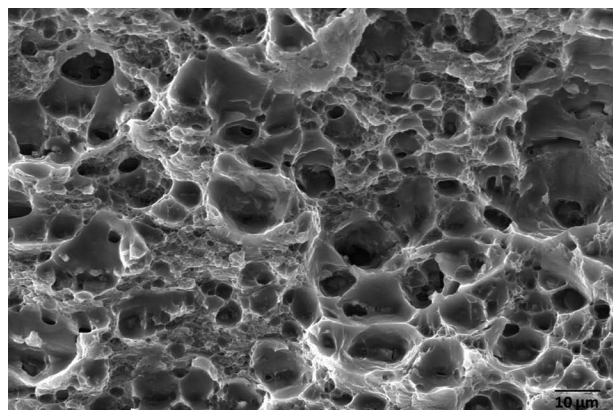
Higher magnified image of the fracture surface shown in Fig. 99
